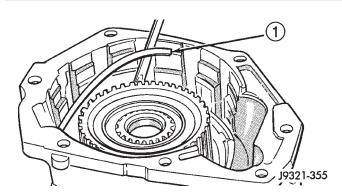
Overdrive Clutch Wave Spring Installation 1 – WAVE SPRING
